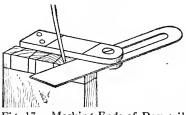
Marking Ends of Dovetail Pins from Sliding Bevel
